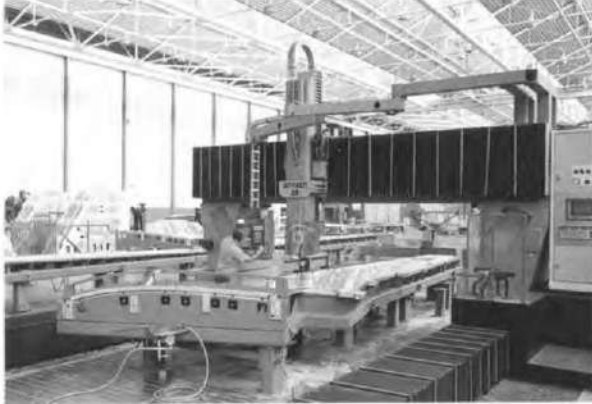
A 5-axis CNC travelling-column machining centre for aerospace machining applications (Courtesy, Jobs S.p.A., Italy)
